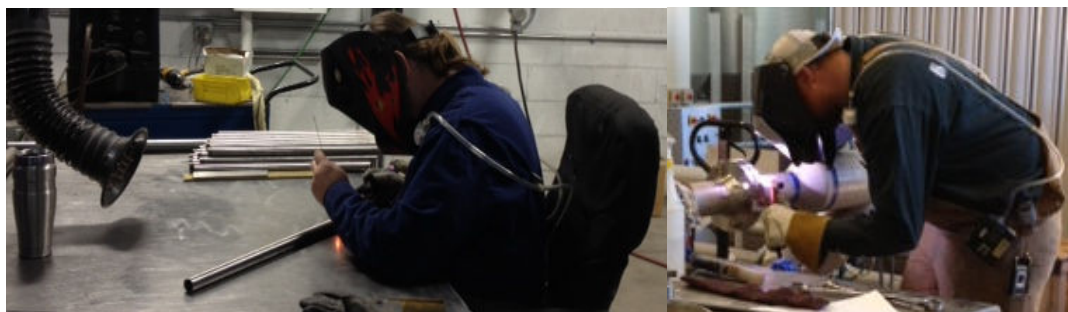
Typical Sampling Scenario for Welding Fumes.
